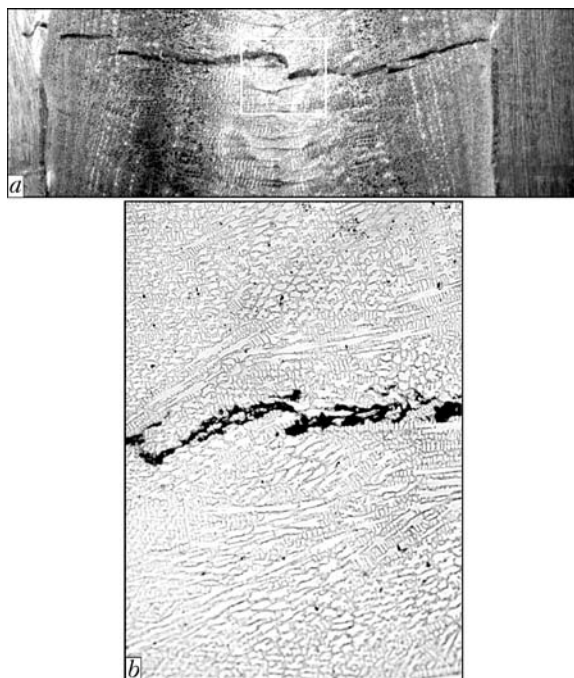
Cracks in weld metal: *a* — surface of welded joint ($\times 25$); *b* — microsection ($\times 200$)
